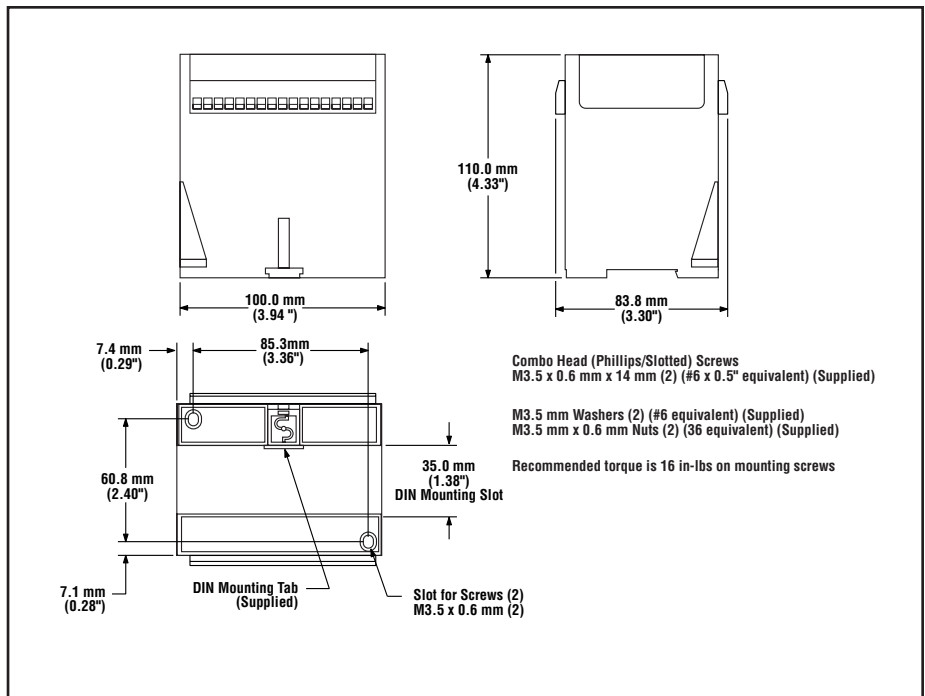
Control Module Dimensions and Mounting Hole Locations.
